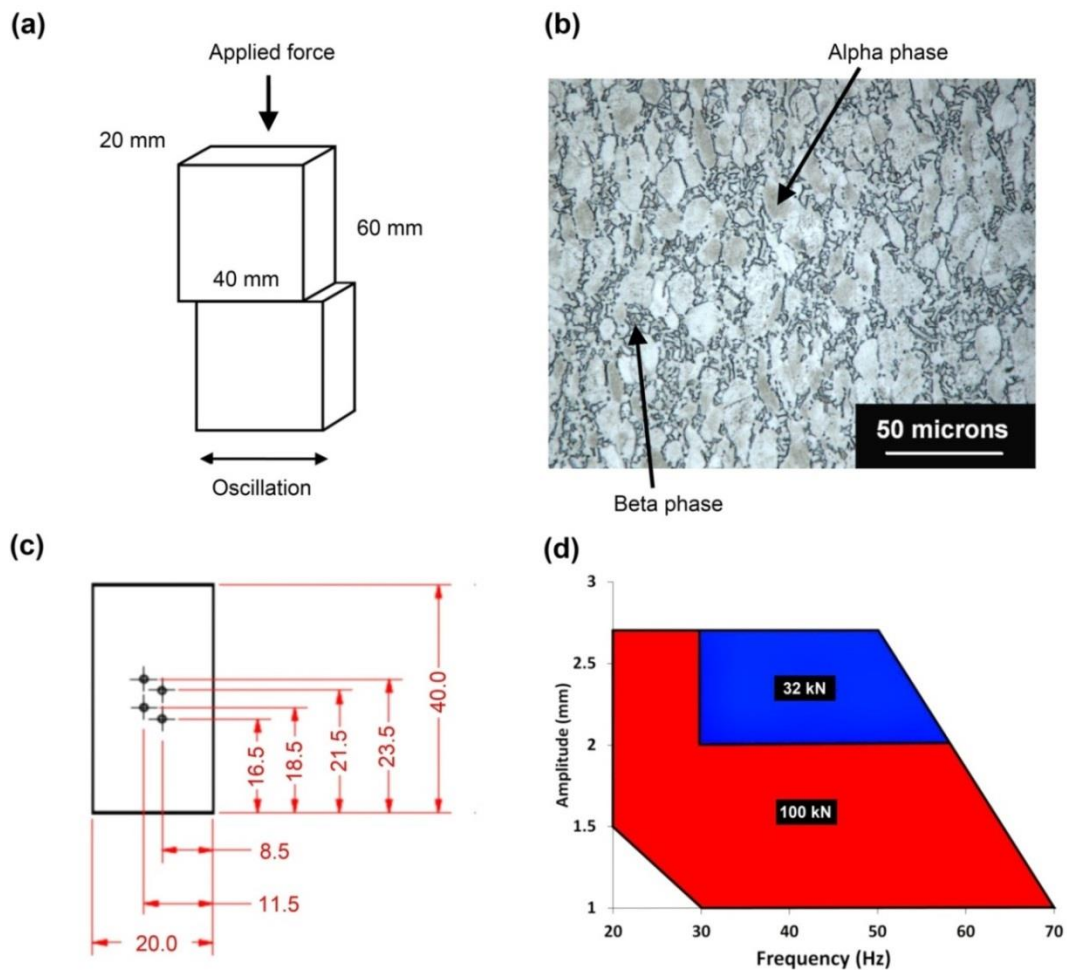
Experimental details showing: (a) workpiece dimensions and movement, (b) bimodal alpha-beta microstructure, (c) workpiece prepared for thermocouples (dimensions in millimetres), and (d) FW34 process input operating window.
